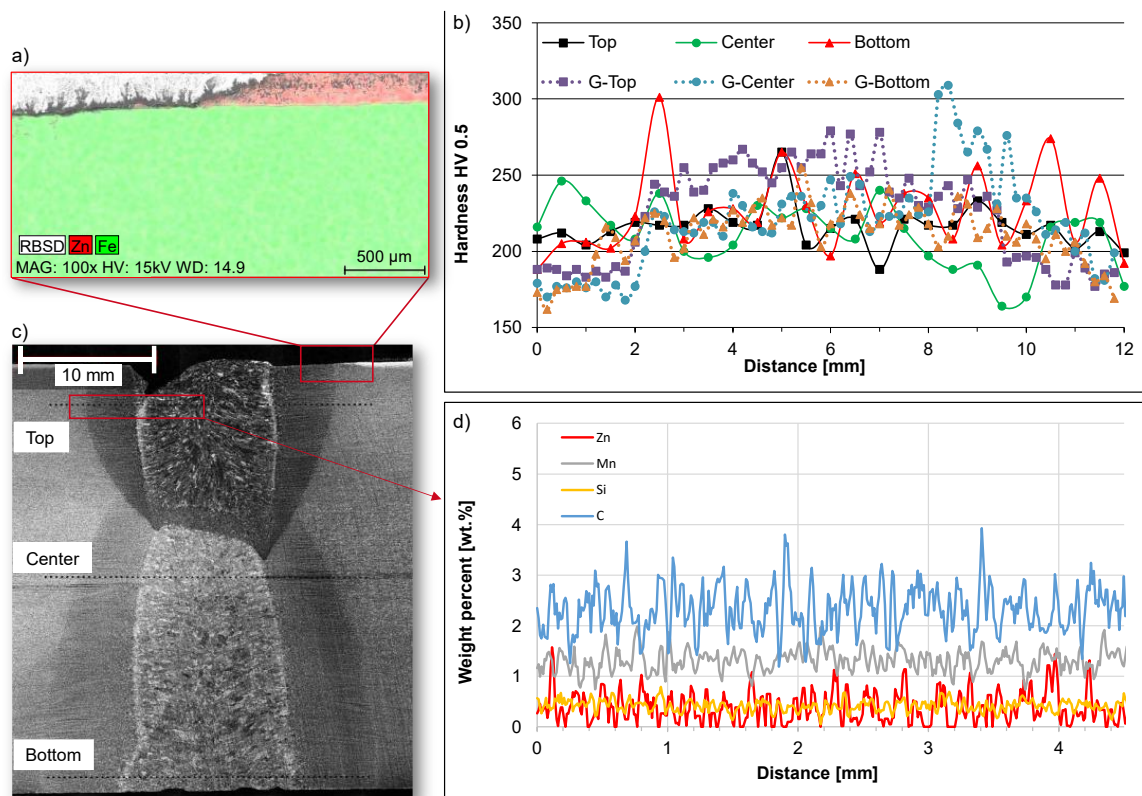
Vickers hardness and EDX measure of weld seam to analyze zinc in weld seam. (a) element mapping (b) comparison of weld seam hardness (c) macro section of weld seam (d) element line scan for base material and weld seam.
